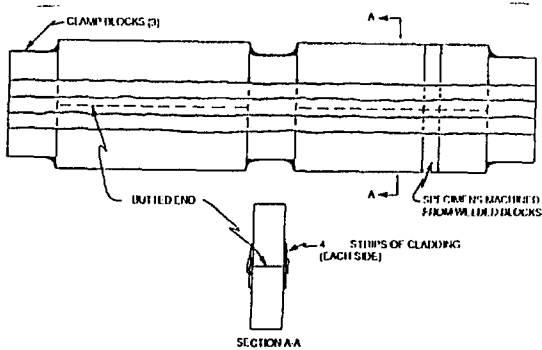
Weldment of type used to fabricate Jo-block specimens.
